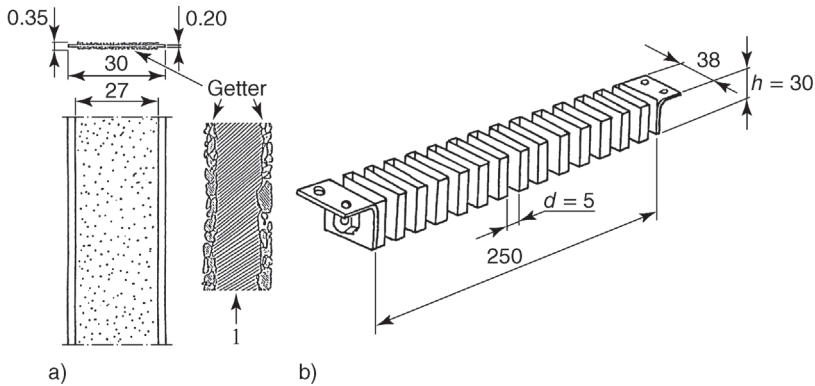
Strip getter: (a) standard strip getter 30D, dimensions given in millimeters; (b) strip getter folded to meander shape with a fixing device (getter module). Courtesy of SAES Getters S.p.A.
